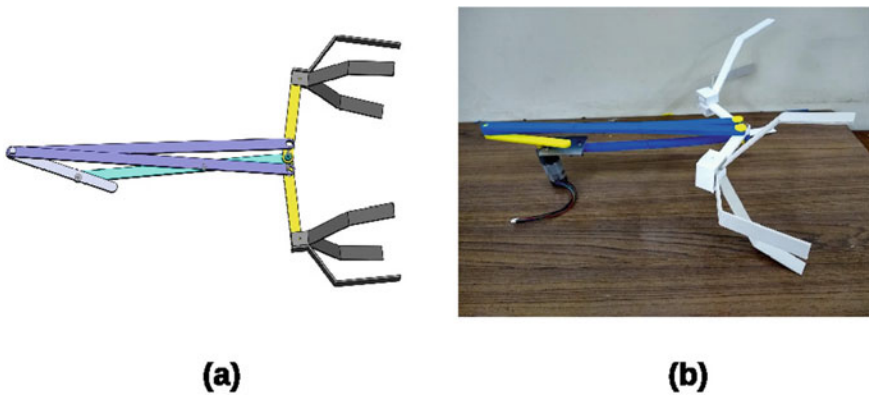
The aerial gripper mechanism. a The computer-aided design of the gripper. b The prototype of the gripper with synthesized dimensions
